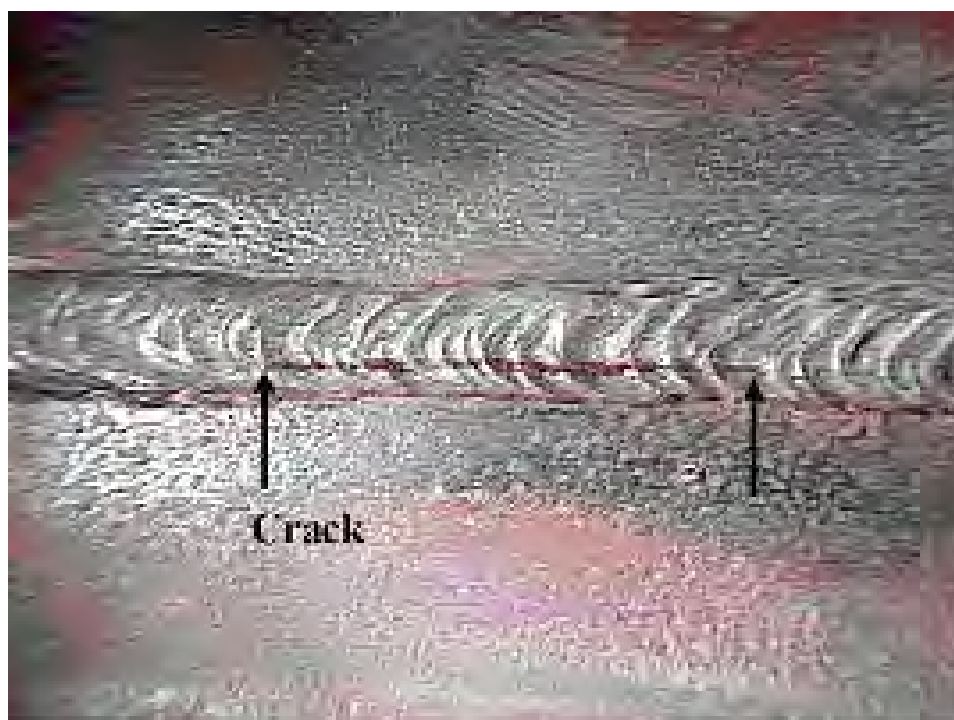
Fatigue crack in a 16-in. pipe-to-elbow weld in the fill line of crude oil storage tank after 50 years in service.
